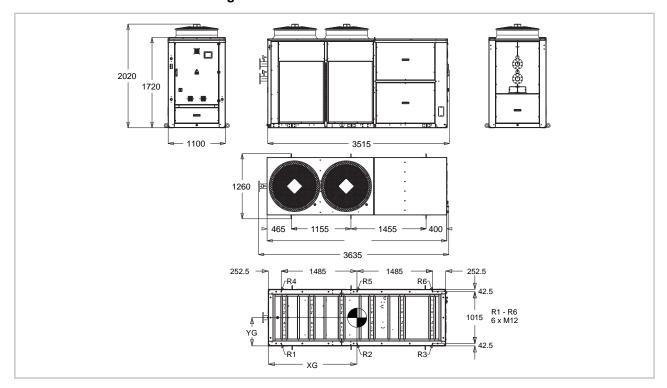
Dimensions of KWP 1220-1480 Eco without storage tank (all measurements in mm)
